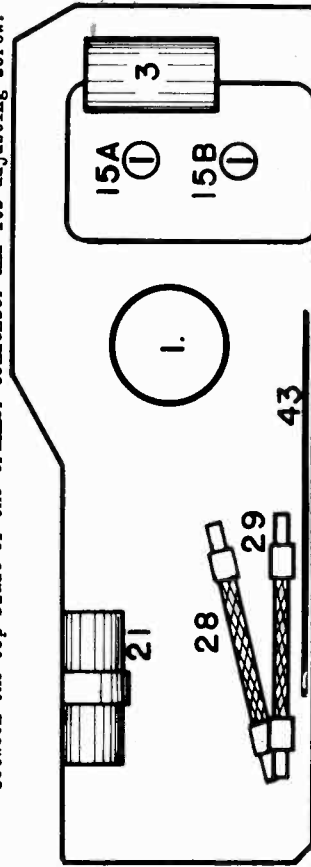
PARTS LAYOUT -- Vibrator filter
